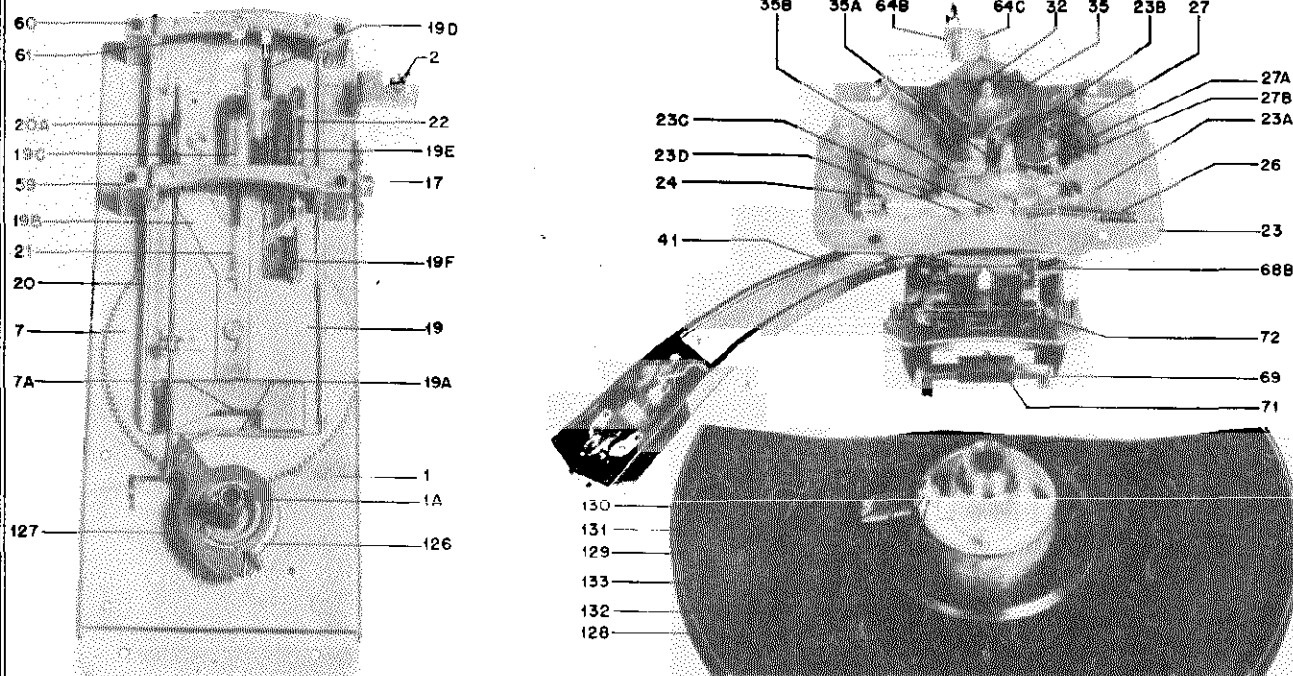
DISASSEMBLED VIEW OF RECORD CHANGER MECHANISM
